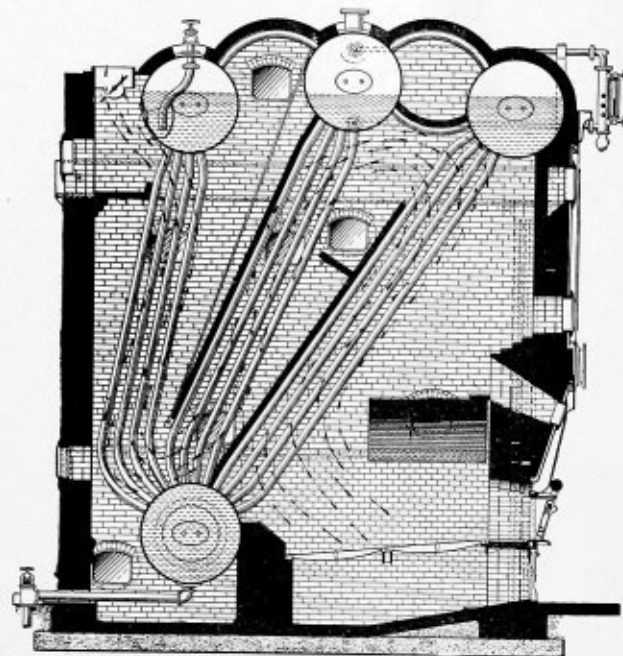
Sectional Side Elevation of 3-Pass Stirling Watertube Boiler
